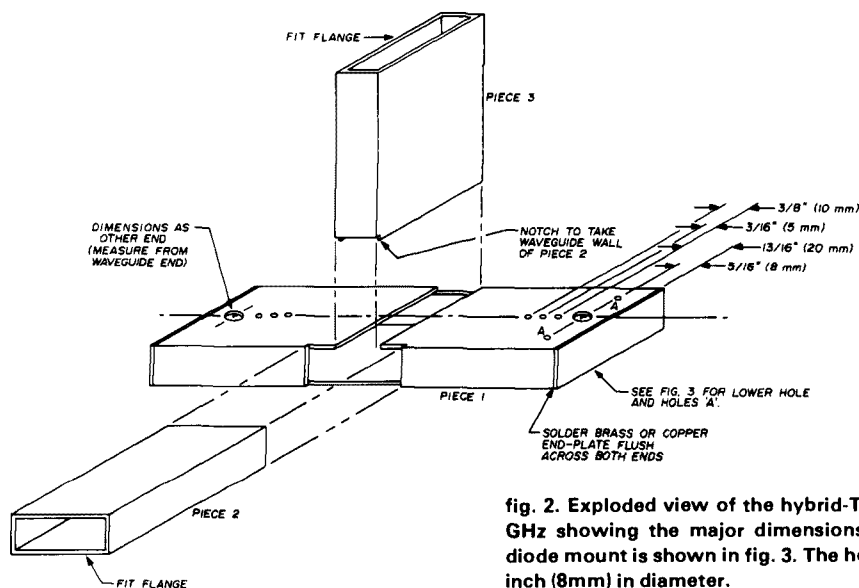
Exploded view of the hybrid-T balanced mixer for 10 GHz showing the major dimensions. Construction of the diode mount is shown in fig. 3. The hole for the diode is 5/16 inch (8mm) in diameter.
